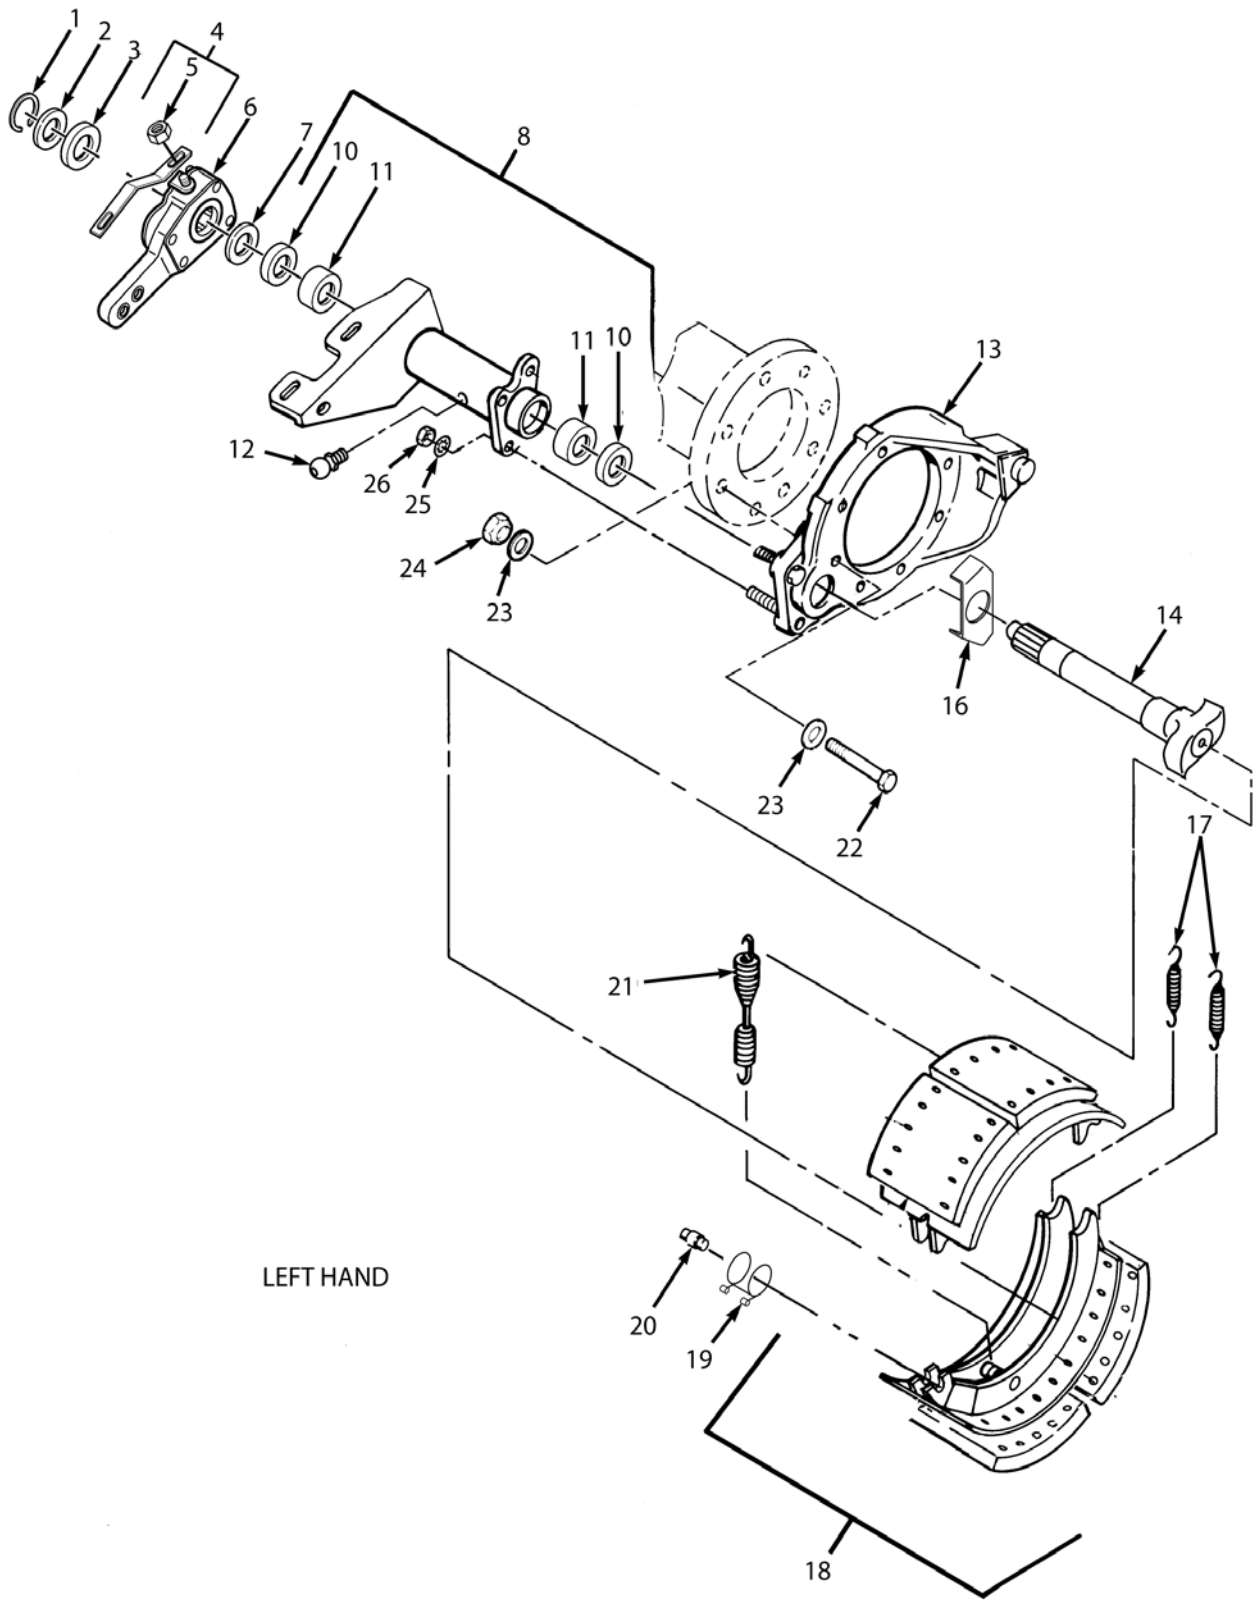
FRONT BRAKE ASSEMBLIES (SHEET 1 OF 2)
